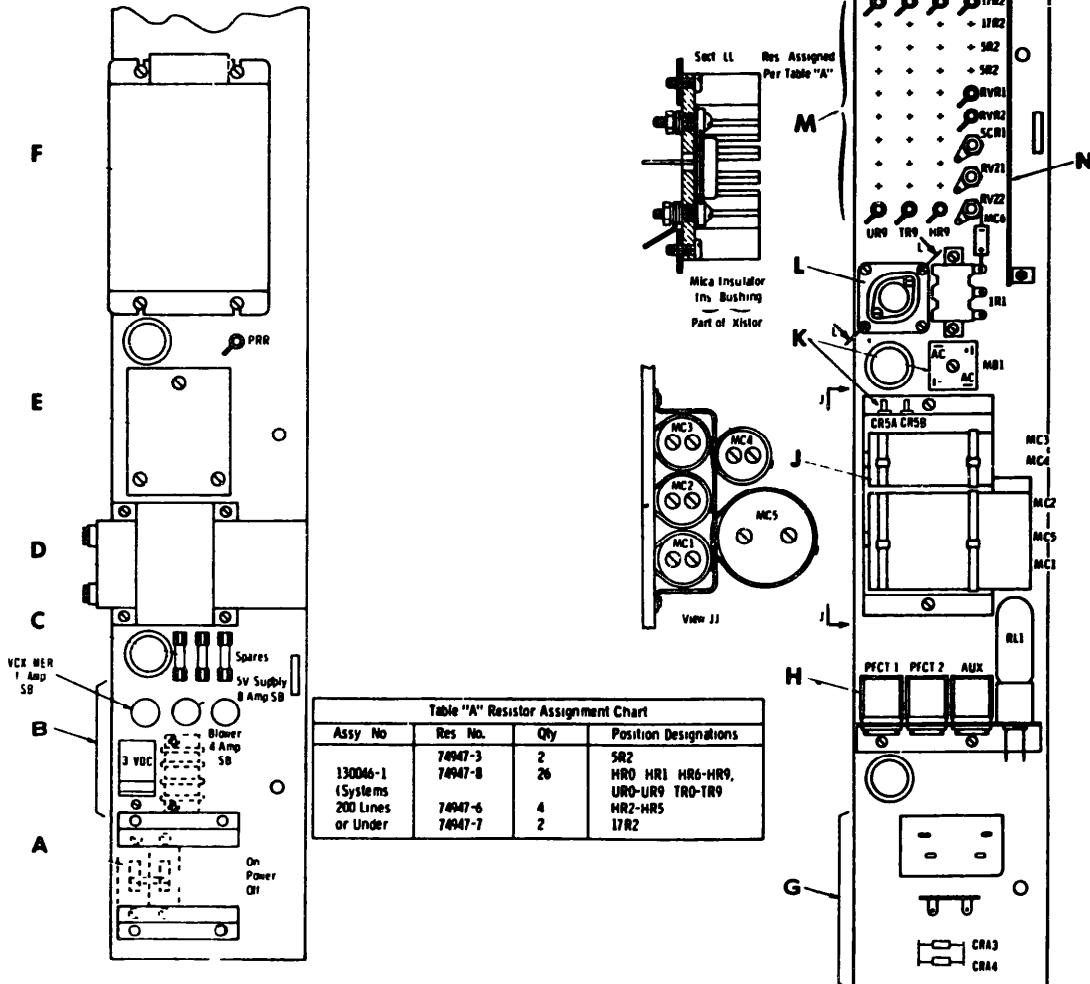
200-Line EPABX, Cabinet 1 Miscellaneous Panel Assembly.
